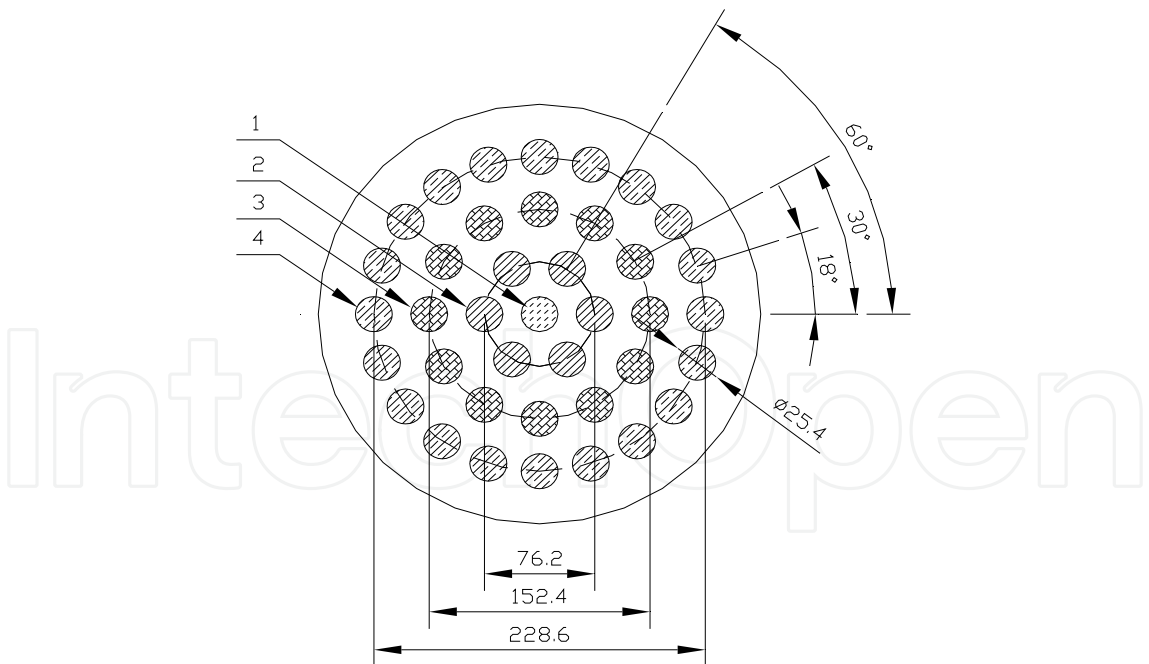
Schematic diagram of the arrangement of in the liquid collecting tubes: 1. Center section with 1 tube; 2. Inner section I with 6 tubes; 3. Inner section II with 12 tubes; and 4.Outer section with 20 tubes (dimension unit: mm)
